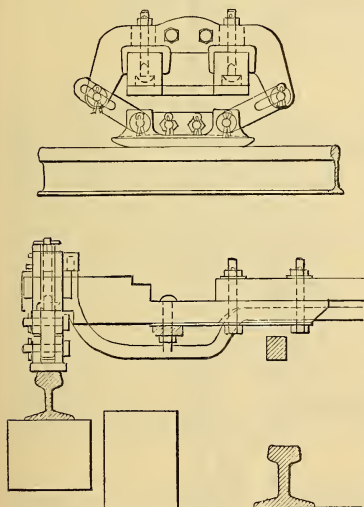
Trolley, Metropolitan West Side Elevated Railway, Chicago, 1895.
